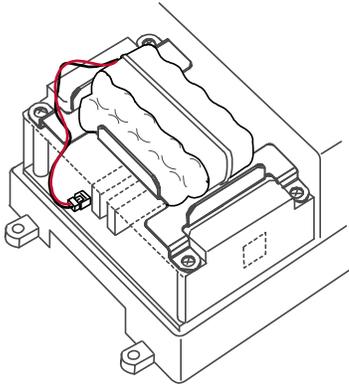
Backup battery connector on HAWK 2xx/6xx bottom board.
